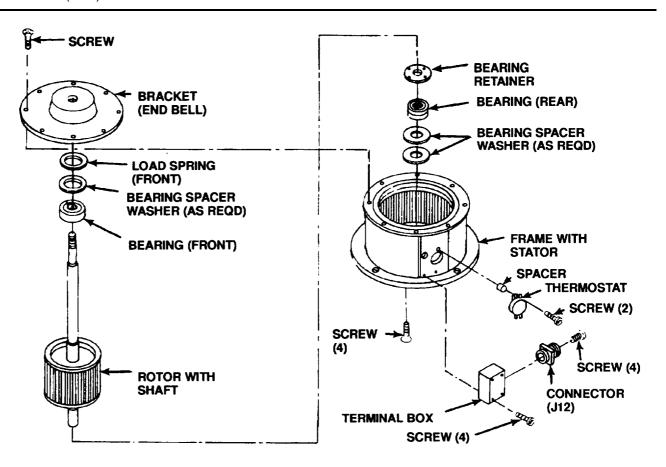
Evaporator and Condenser Fan Motor (Welco)
